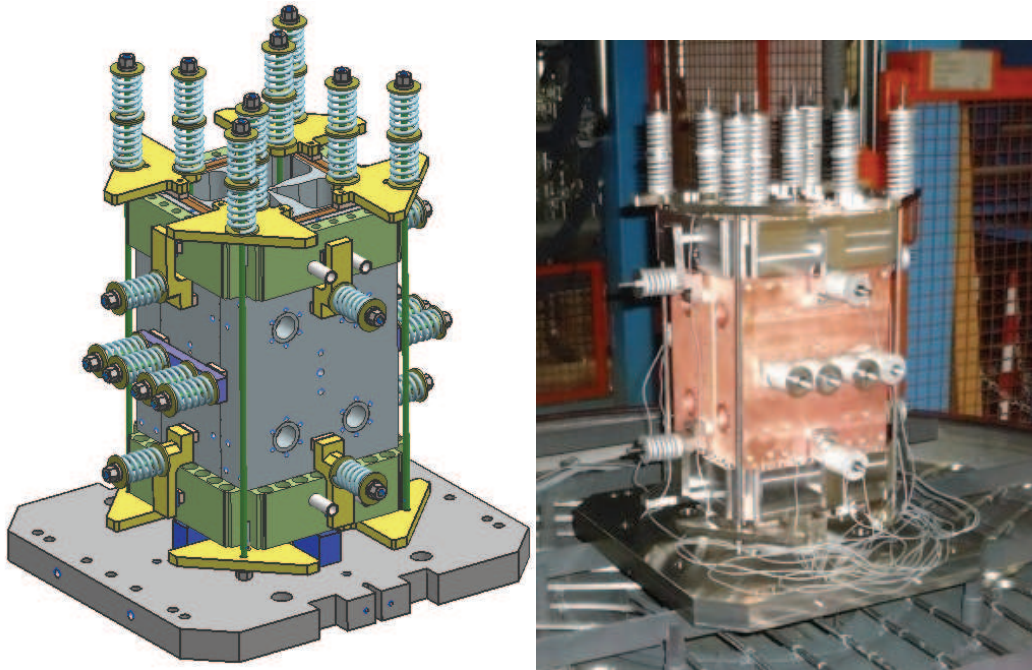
Exploded view of the mini prototype RFQ for the vertical brazing test in one phase.
